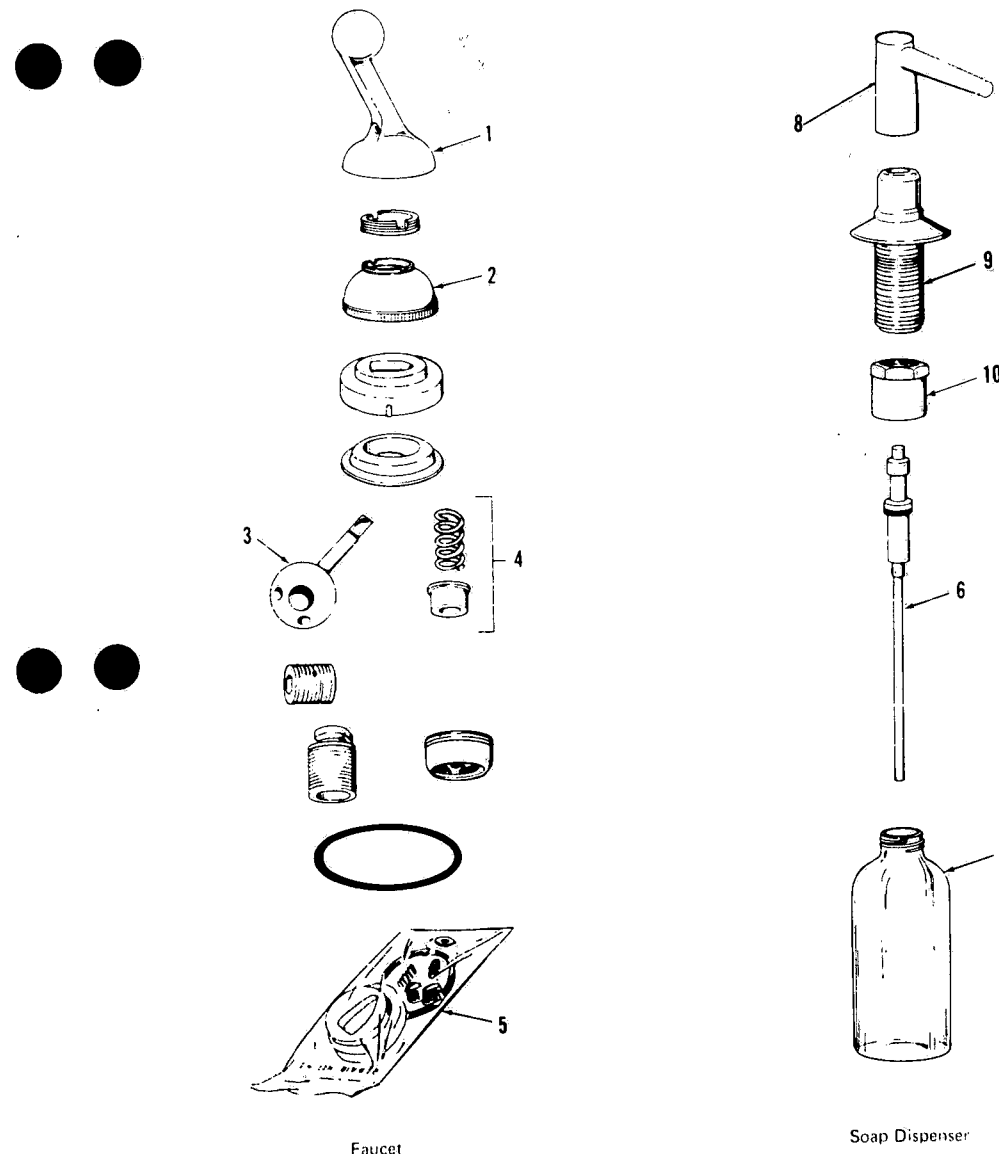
FAUCET AND SOAP DISPENSER ASSEMBLY.
